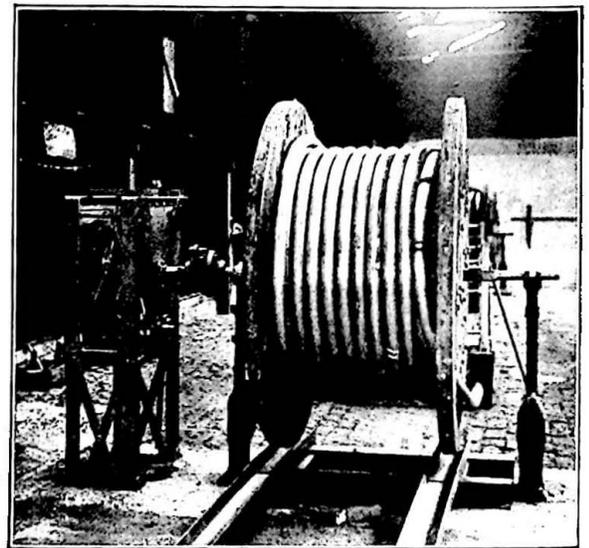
CABLE DRUM AND WINDING MACHINE.
